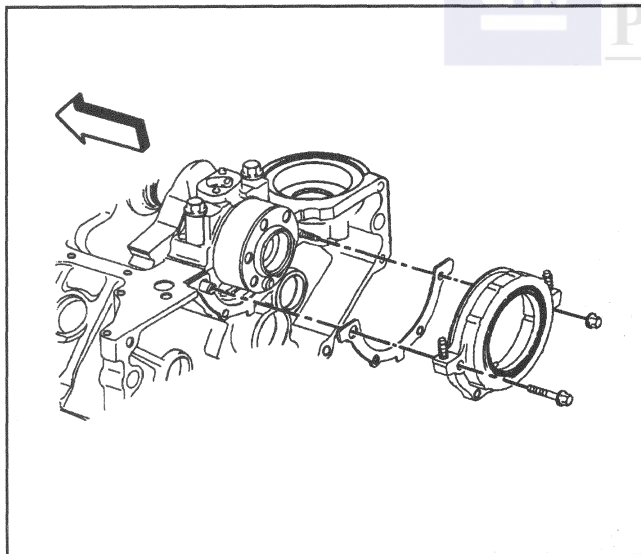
Crankshaft Rear Oil Seal Housing, Housing Gasket, and Rear Oil Seal
